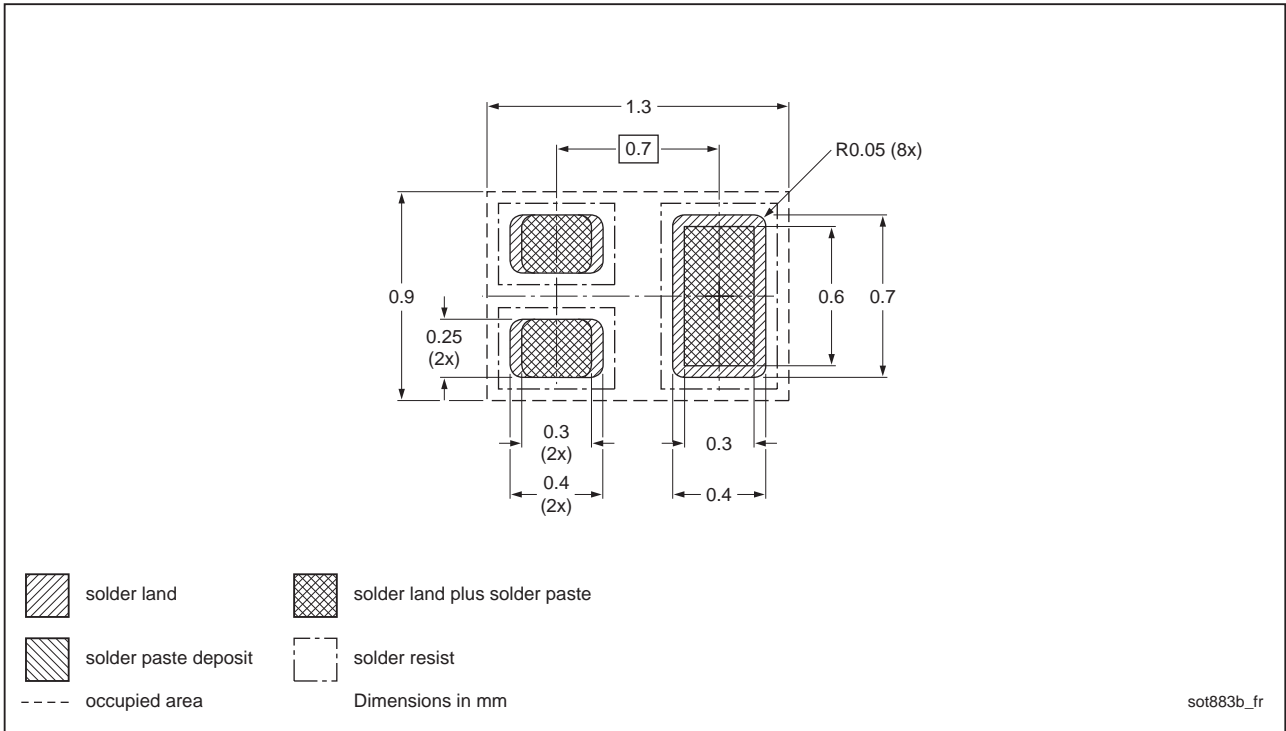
Reflow soldering footprint for SOT883B (DFN1006B-3)
